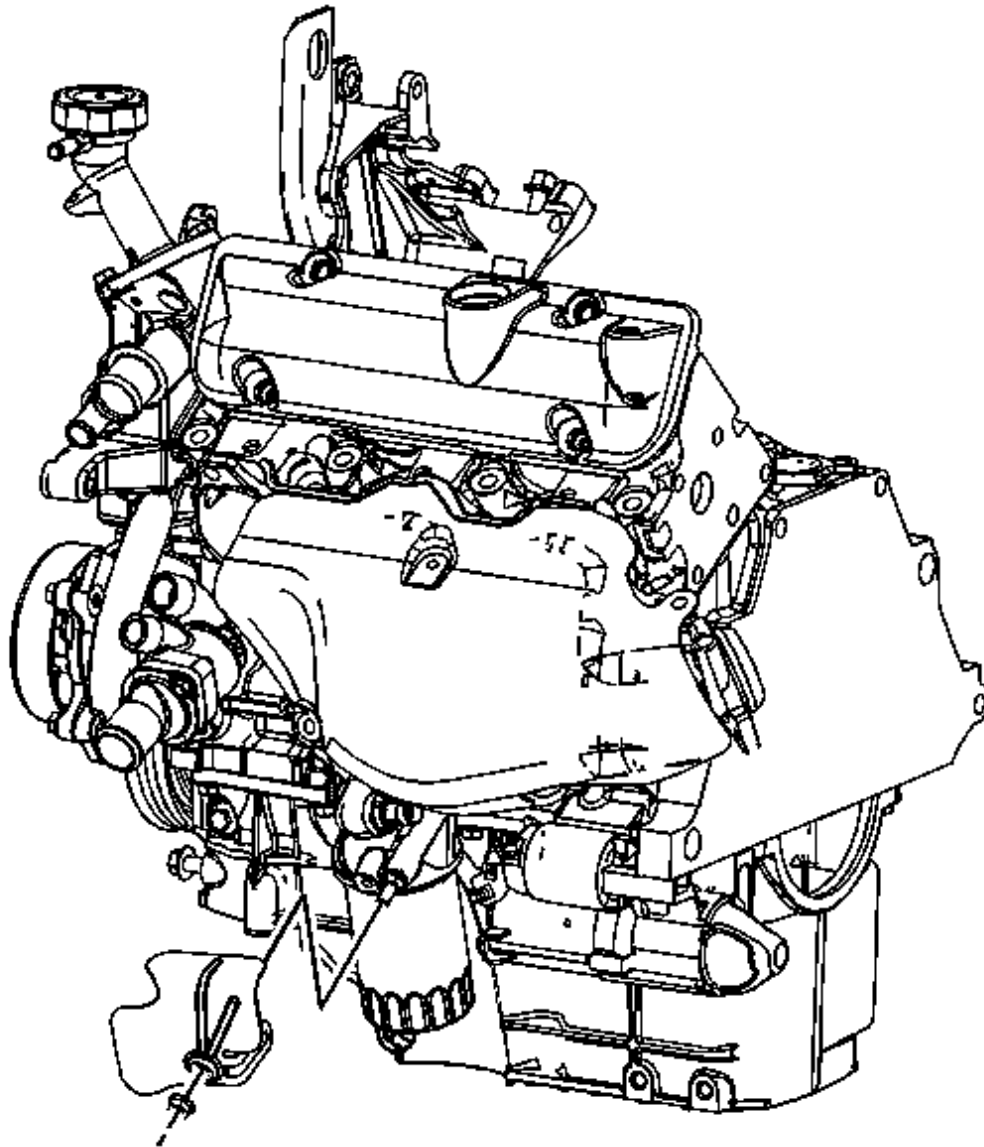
Locating Oil Pressure Sensor Heat Shield & Nut
